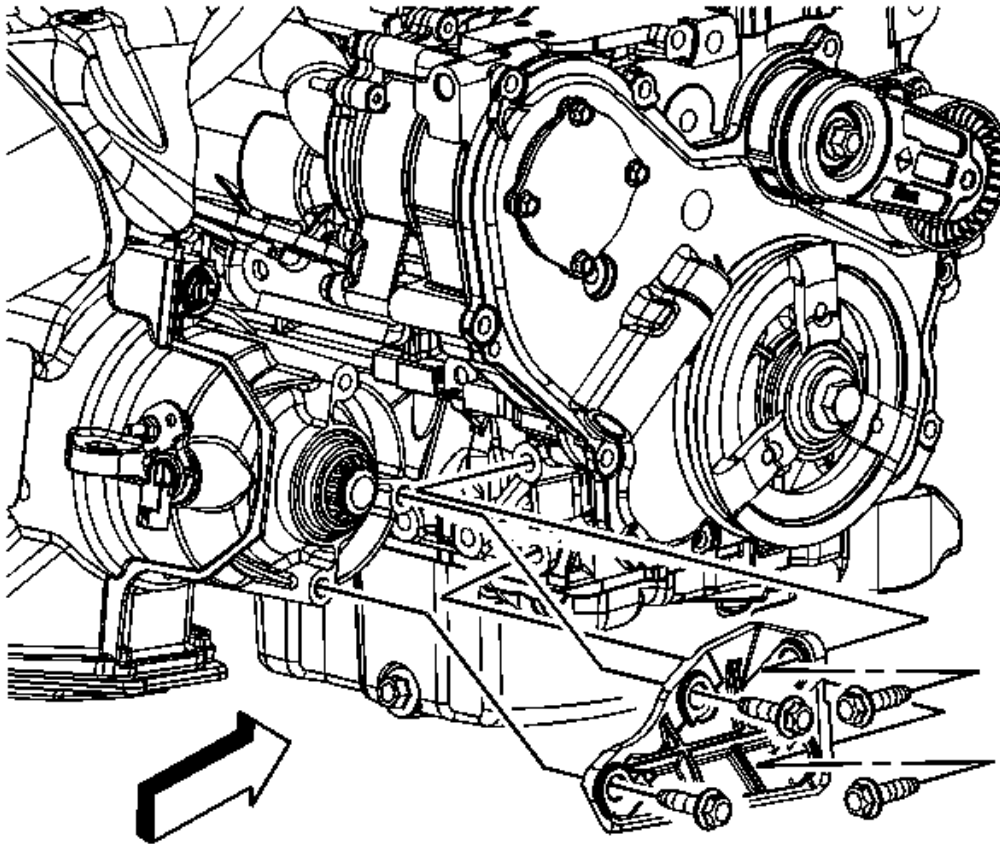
View Of Transaxle Brace-To-Engine Bolts
